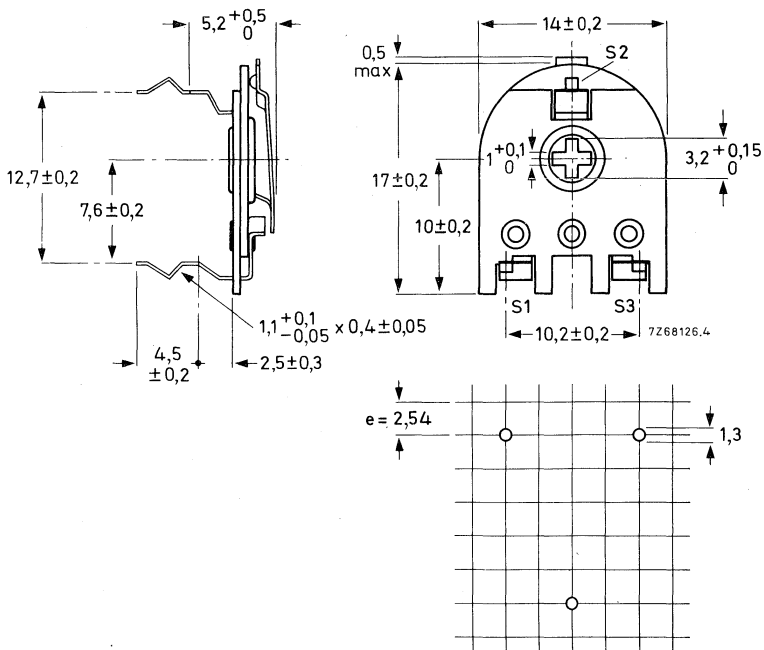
Potentiometer for horizontal mounting, with snap-in printed-wiring pins.
